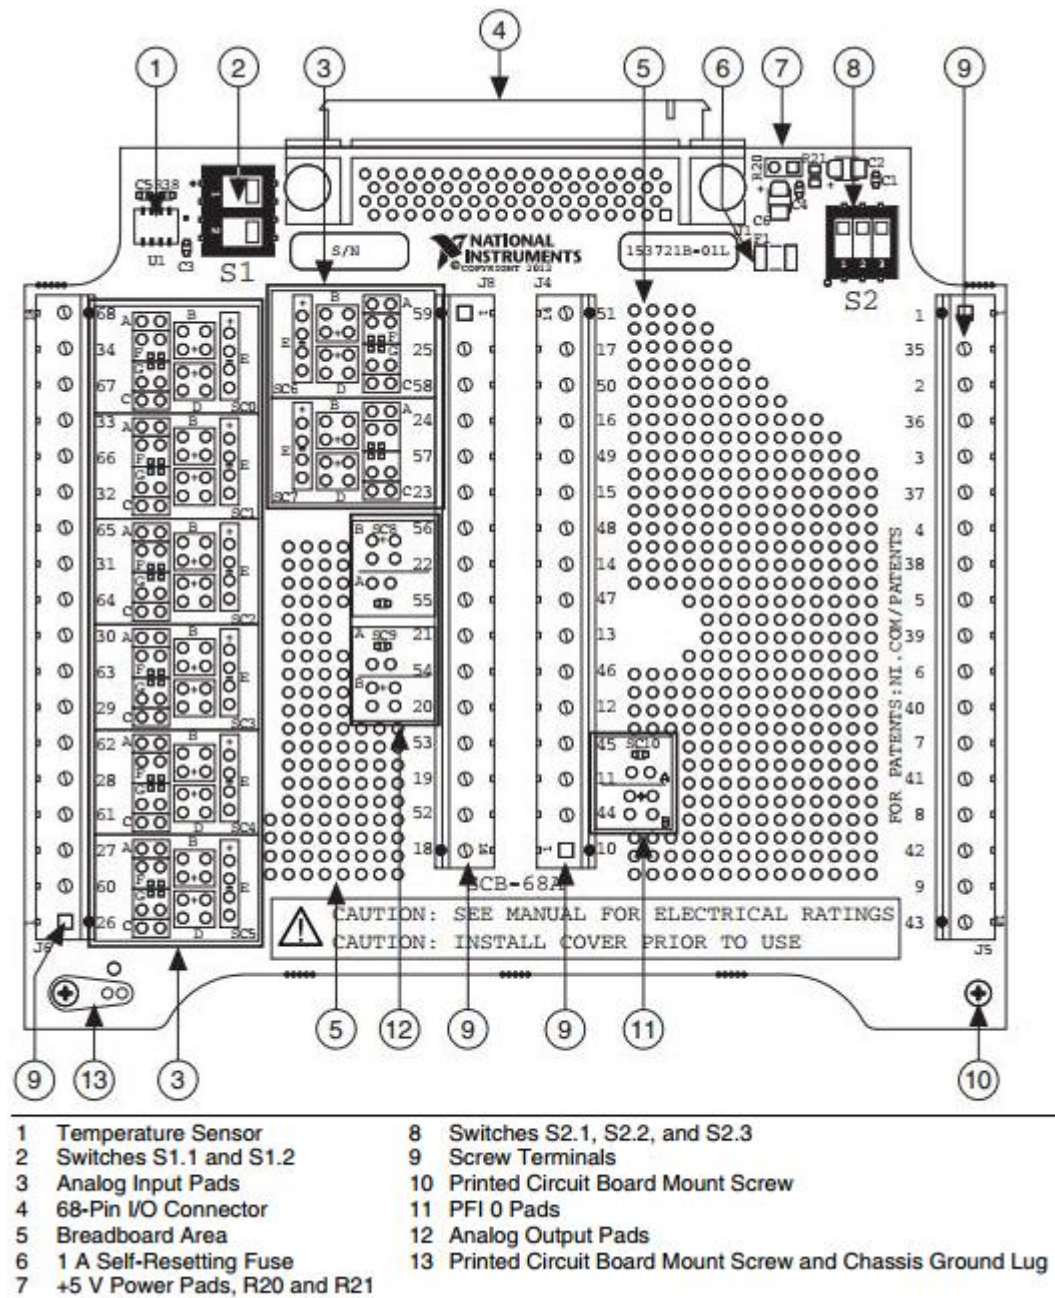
SCB-68A Printed Circuit Board Diagram
